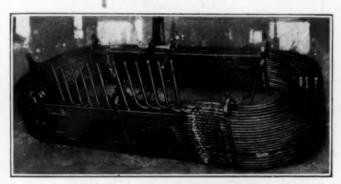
All-welded Coil for a Large Heating Vessel
